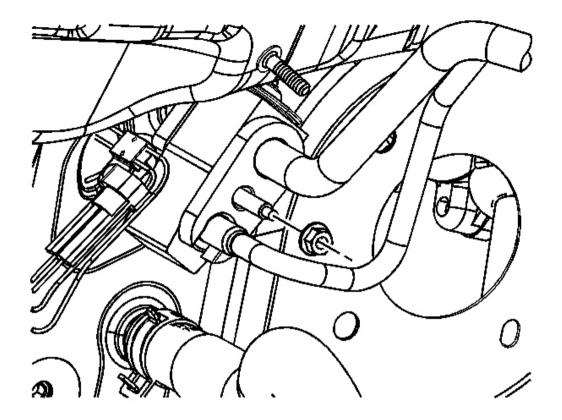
Sealing Washers, Evaporator Outlet Hose, Liquid Line & Protective Caps Courtesy of GENERAL MOTORS CORP.
